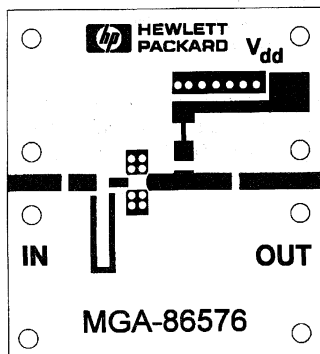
Layout for MGA-86576 Demonstration Amplifier. PCB dimensions are 1.18 inches wide by 1.30 inches high.
